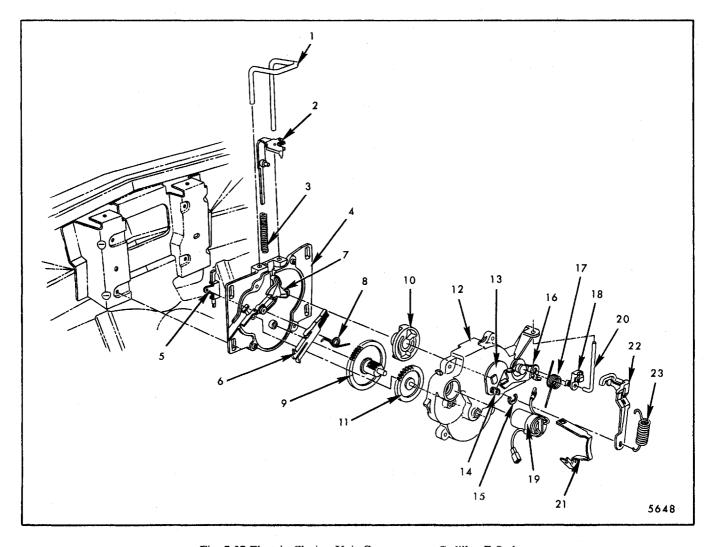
Electric Closing Unit Components - Cadillac E Style
